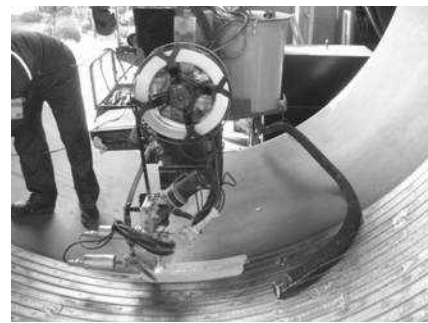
Overlay welding for joining between nozzle to shell
